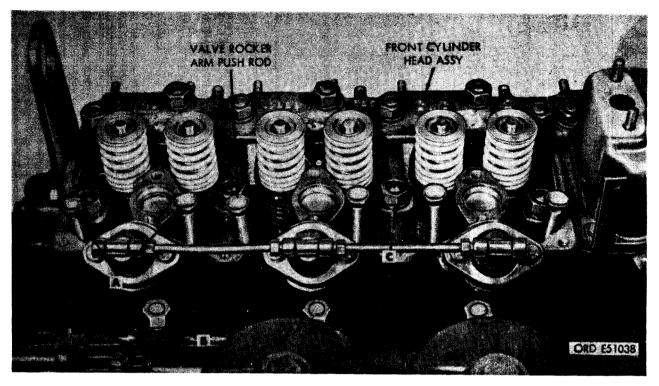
REMOVING OR INSTALLING PUSH RODS AND FRONT CYLINDER HEAD ASSEMBLY.
